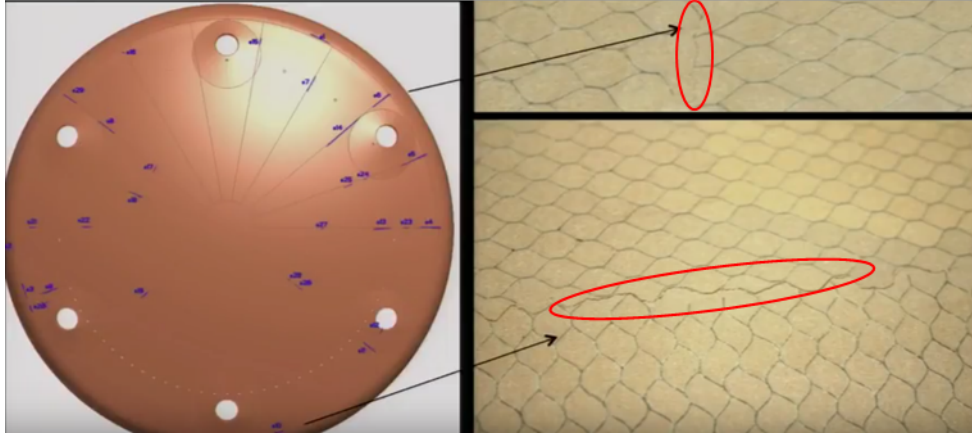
Typical EFT-1 Avcoat crack geometries¹²
